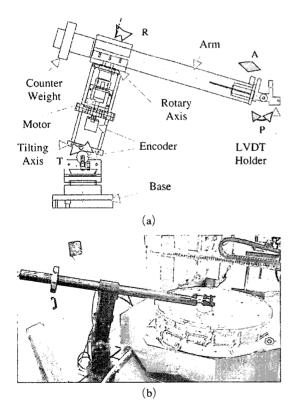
Design of swing-arm measuring system and set up on the side of a lapping machine for concave mirror
